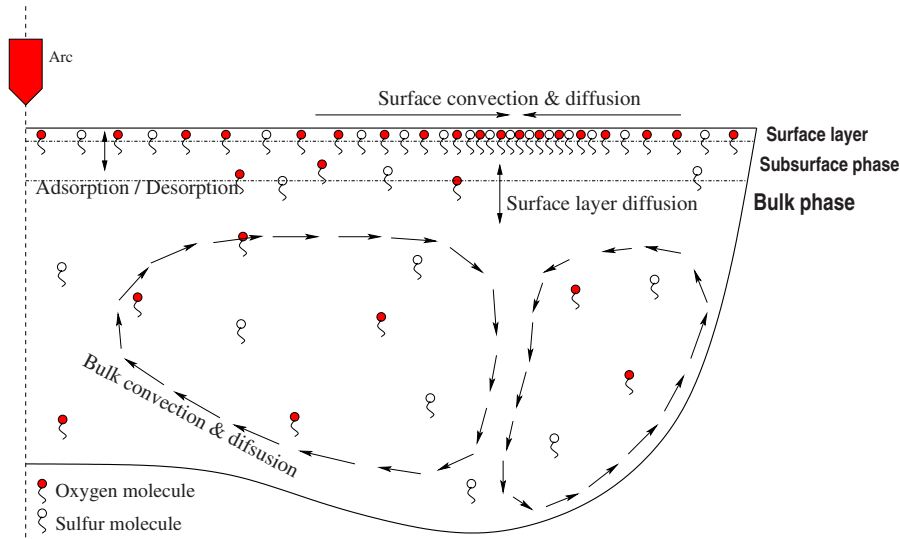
Modeling multicomponent surfactant mass transfer in the weld pool
